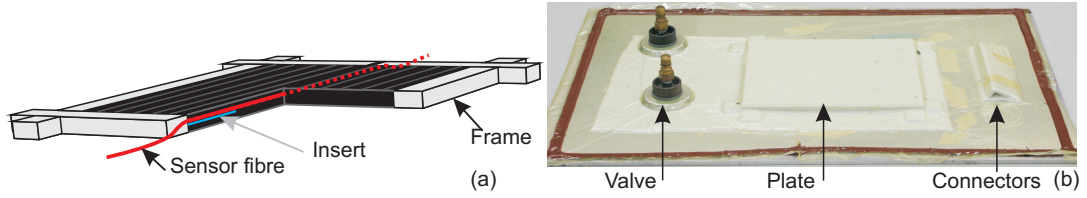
(a) A schematic of the lay up with the aluminium frame and the placement of the insert and the sensor fibre. (b) The photograph shows the lay-up as it went into the autoclave.
